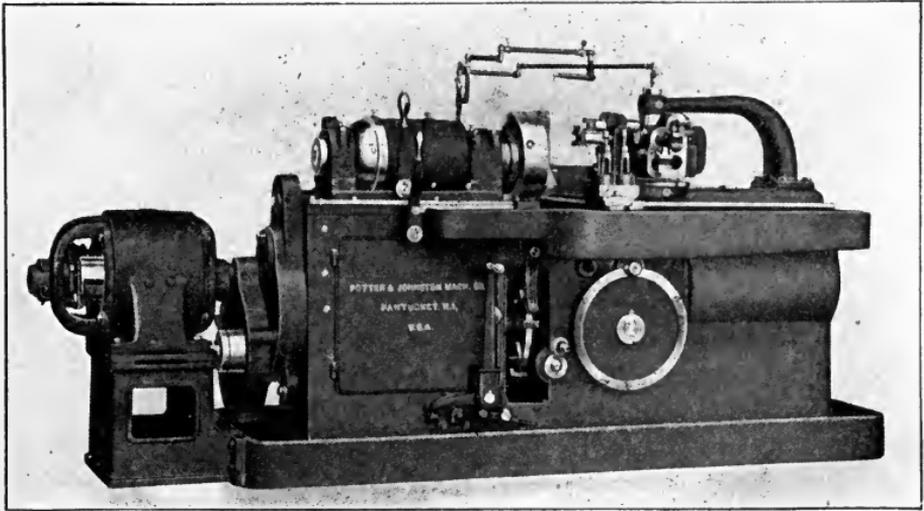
Latest Type of Automatic Chucking and Turning Machine
